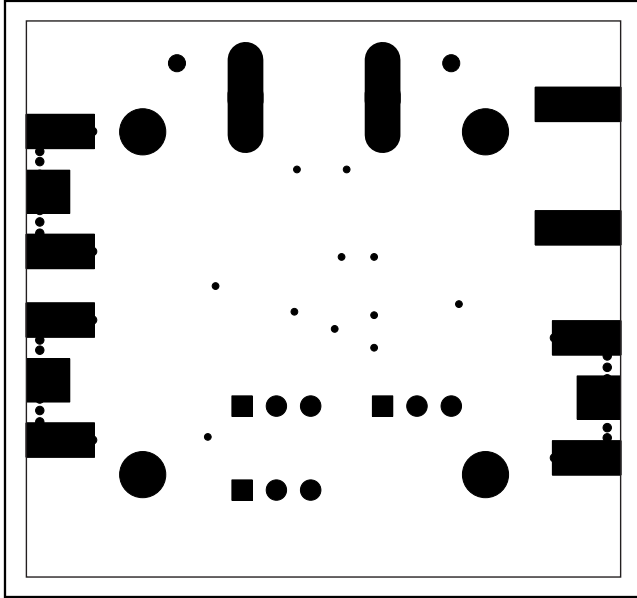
MAX3812 EV Kit PC Board Layout—Solder Side
